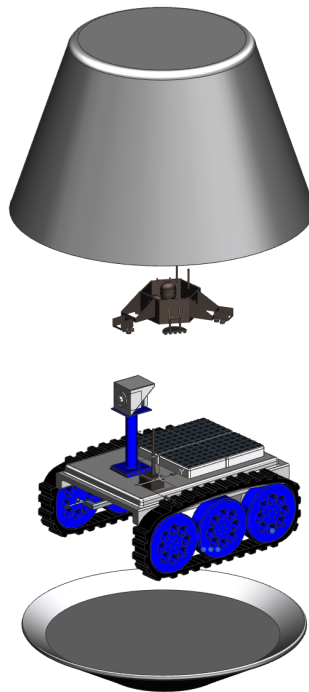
Isometric view of exploded Undecim Portam system assembly.
